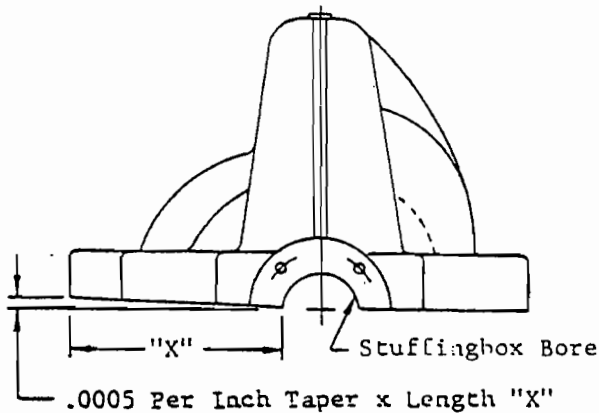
Crowned Faces on Parting Flanges—Multistage Axially Split Pump.
